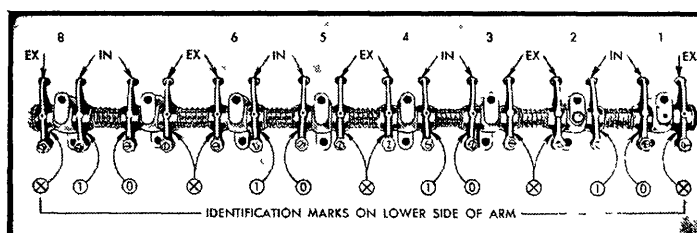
Rocker arm assembly, 1946-52 Series 70
